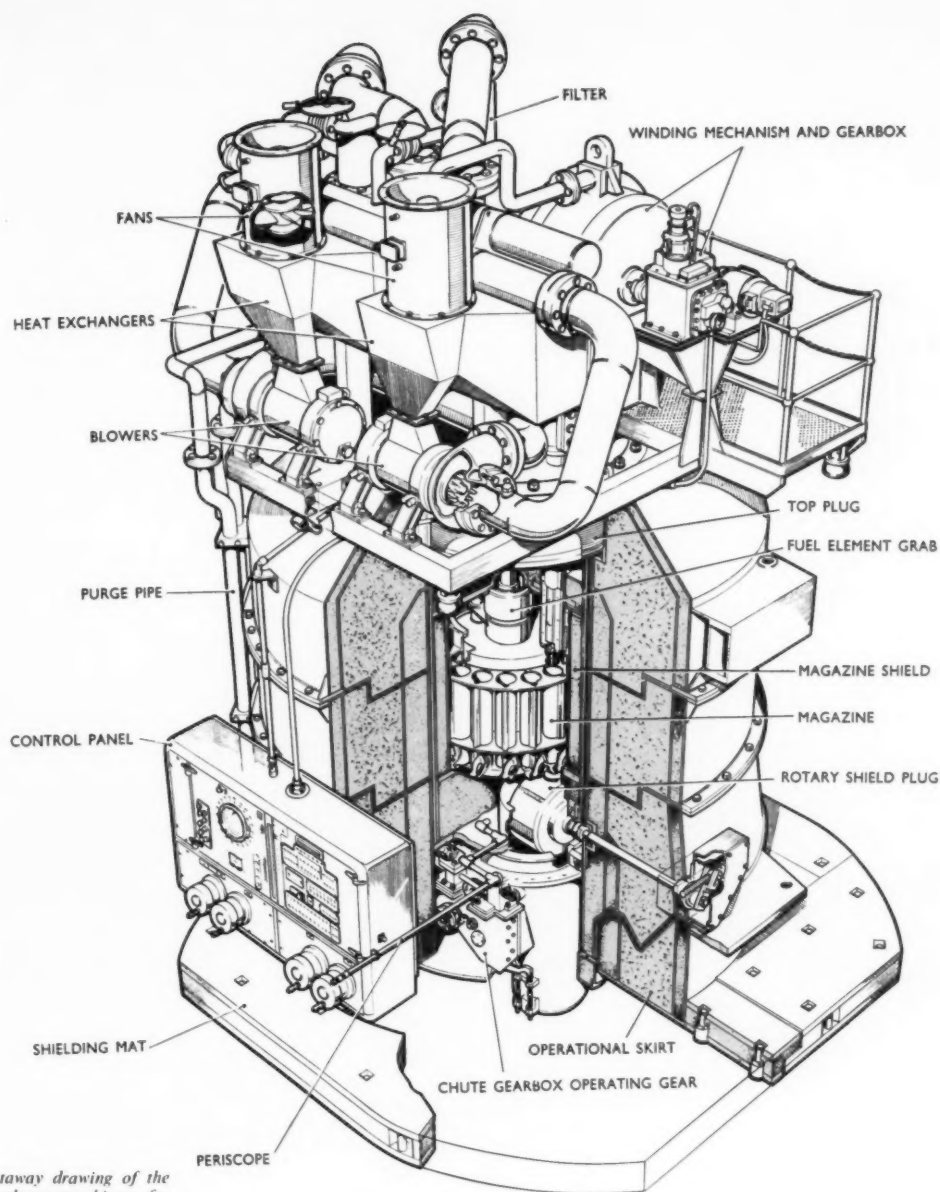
A cutaway drawing of the charge and discharge machinery for handling the fuel elements
